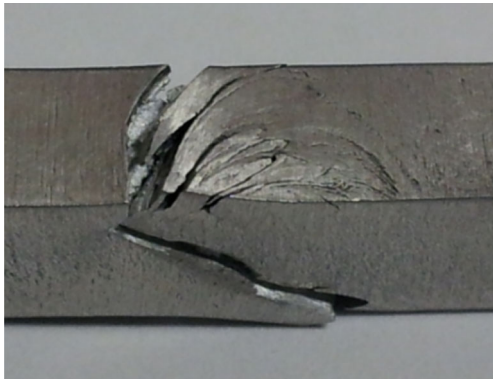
Fracture zone under the tool pin in sample 7n (cold weld); notice the delaminated regions in vicinity of the weld line
